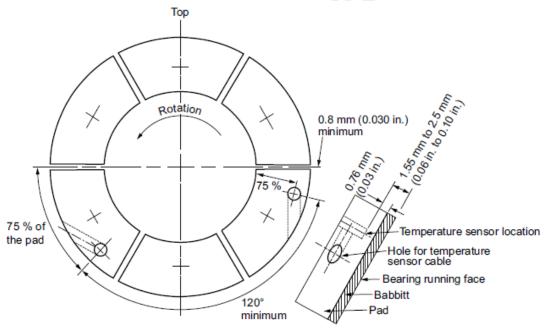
Typical Installation of Thrust Bearing Temperature Sensors
